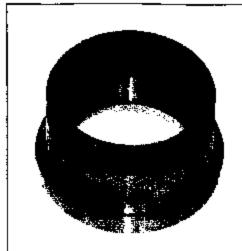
Bearing: 918287-IB, bore is loaded zone. Showing the maisture corrosion in the bare at the thinnest section of the ring.
